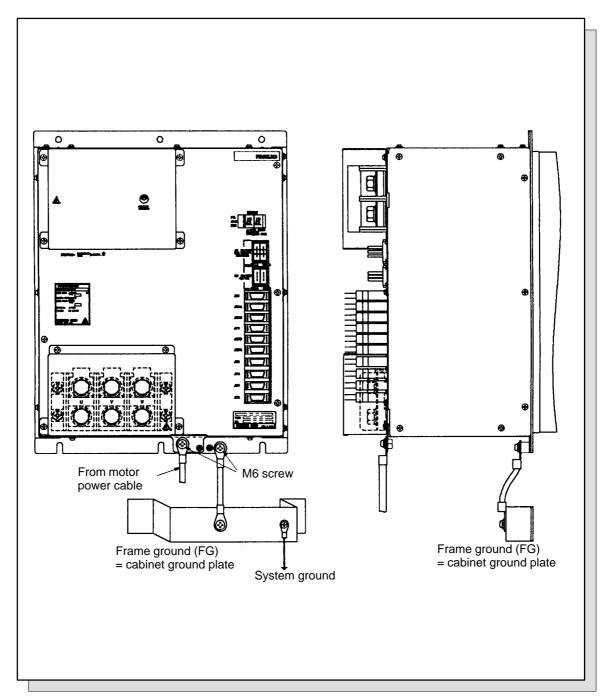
(n) Ground Cable Connection (SPM-45, 75HV)
